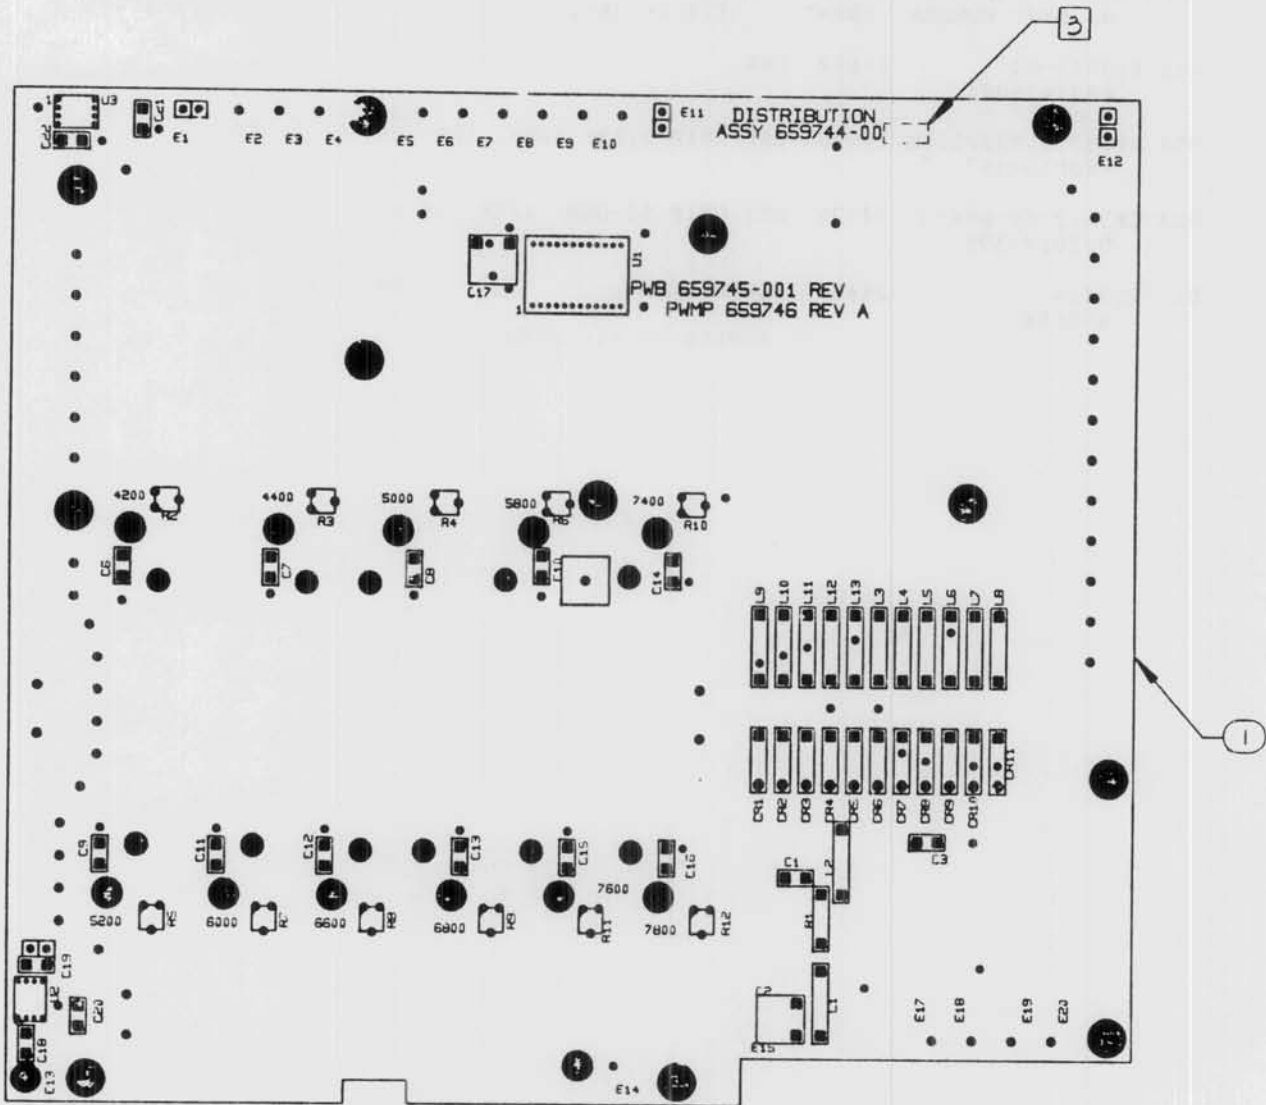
Mixer CCA A4A3 Parts List, Part No. 659740 (Sheet 1 of 2)
